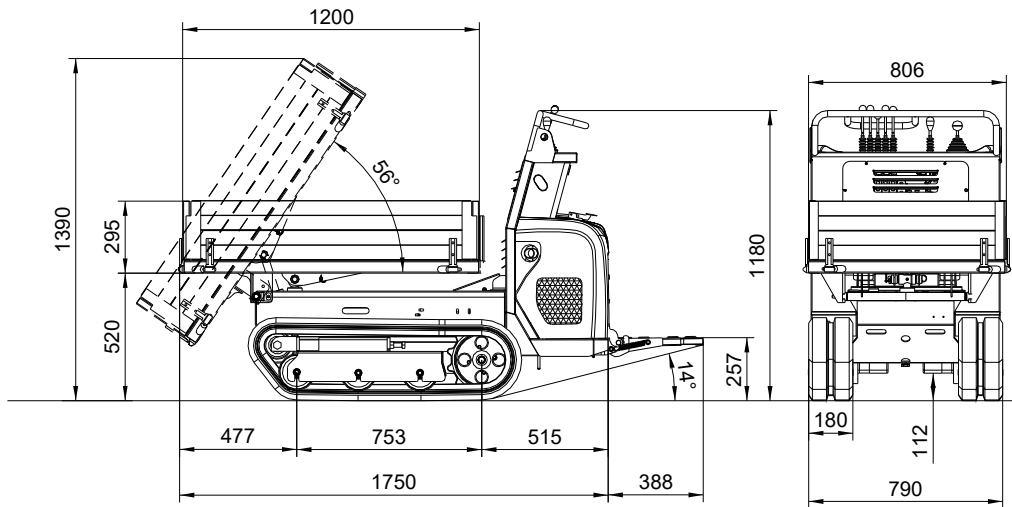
Vehicle dimensions (model DT08-P with front skip)
